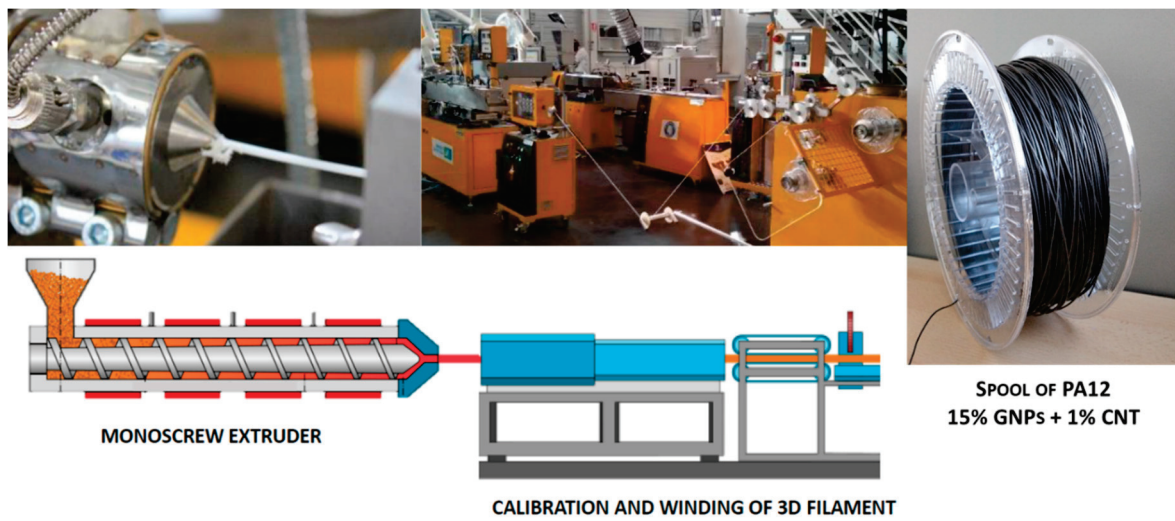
3D printing fillers produced by a single-screw extruder combined with a filament shaper.
